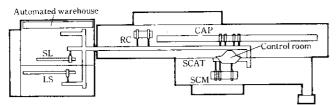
Layout of the cold mill and finishing plant for stainless steel
